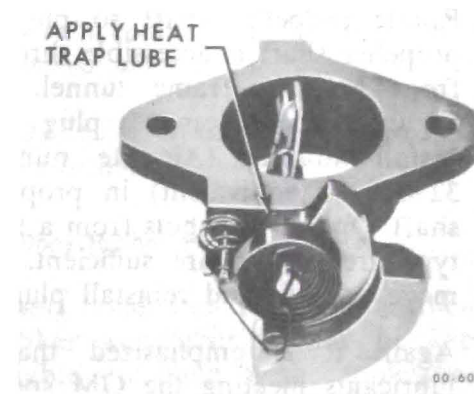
Lubricating Points on Manifold Heat Control Valve - 350 Engine
